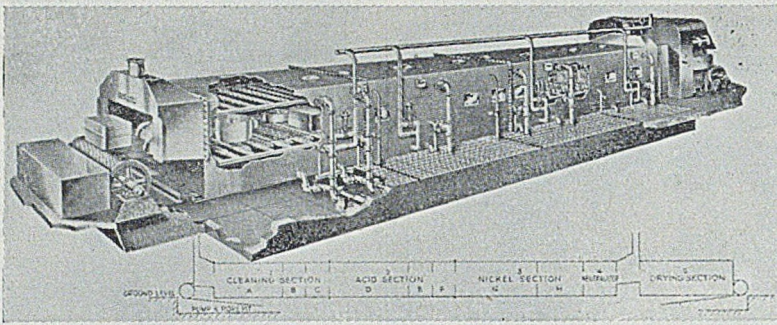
Continuous Spray-type Pickling and Washing Plant.
